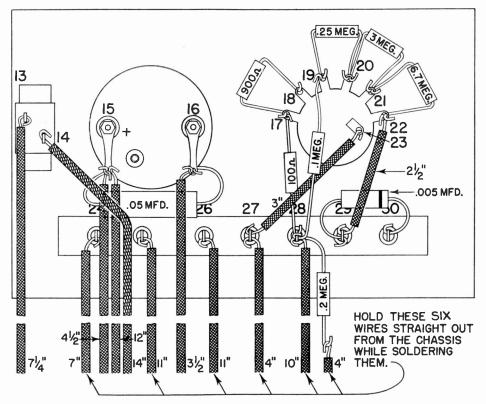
Rear view of front panel after all leads and parts have been connected with permanent soldered hook joints. The length in inches to which you should cut each piece of hook-up wire is indicated along-side the wire. To save space in this manual and to simplify this diagram, the long leads are shown in shortened form below the panel. Each of the six long jack leads should be held at right angles to the panel while being soldered; these wires can then be bent to the right along the bottom of the panel so they will not interfere with your work. At this stage of the assembly, all joints should have closed hooks and be soldered exactly according to the instructions in the text.
